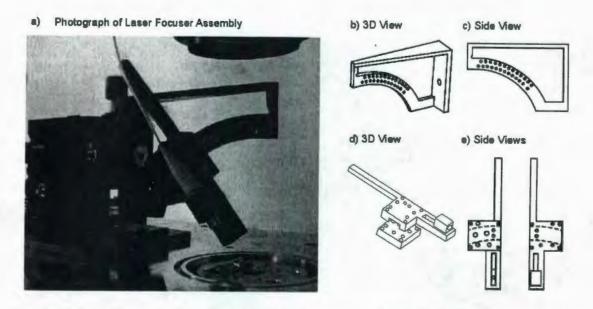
Laser focuser holder assembly: a) photograph of the laser focuser assembly; b) 3D view of the laser arm; c) side view of the laser arm; d) 3D view of the laser holder; e) side views of the laser holder.
